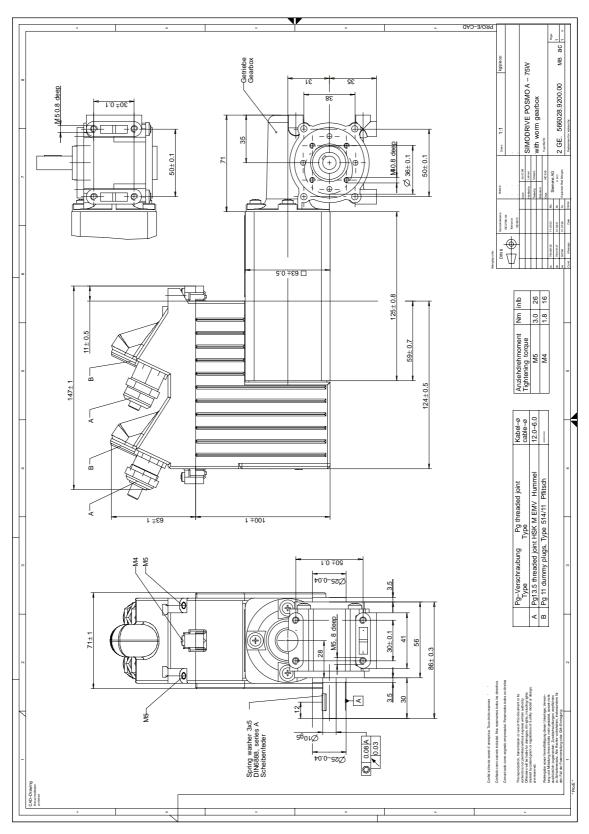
Dimension drawing: SIMODRIVE POSMO A $-75~\mathrm{W}$ with worm gearbox
